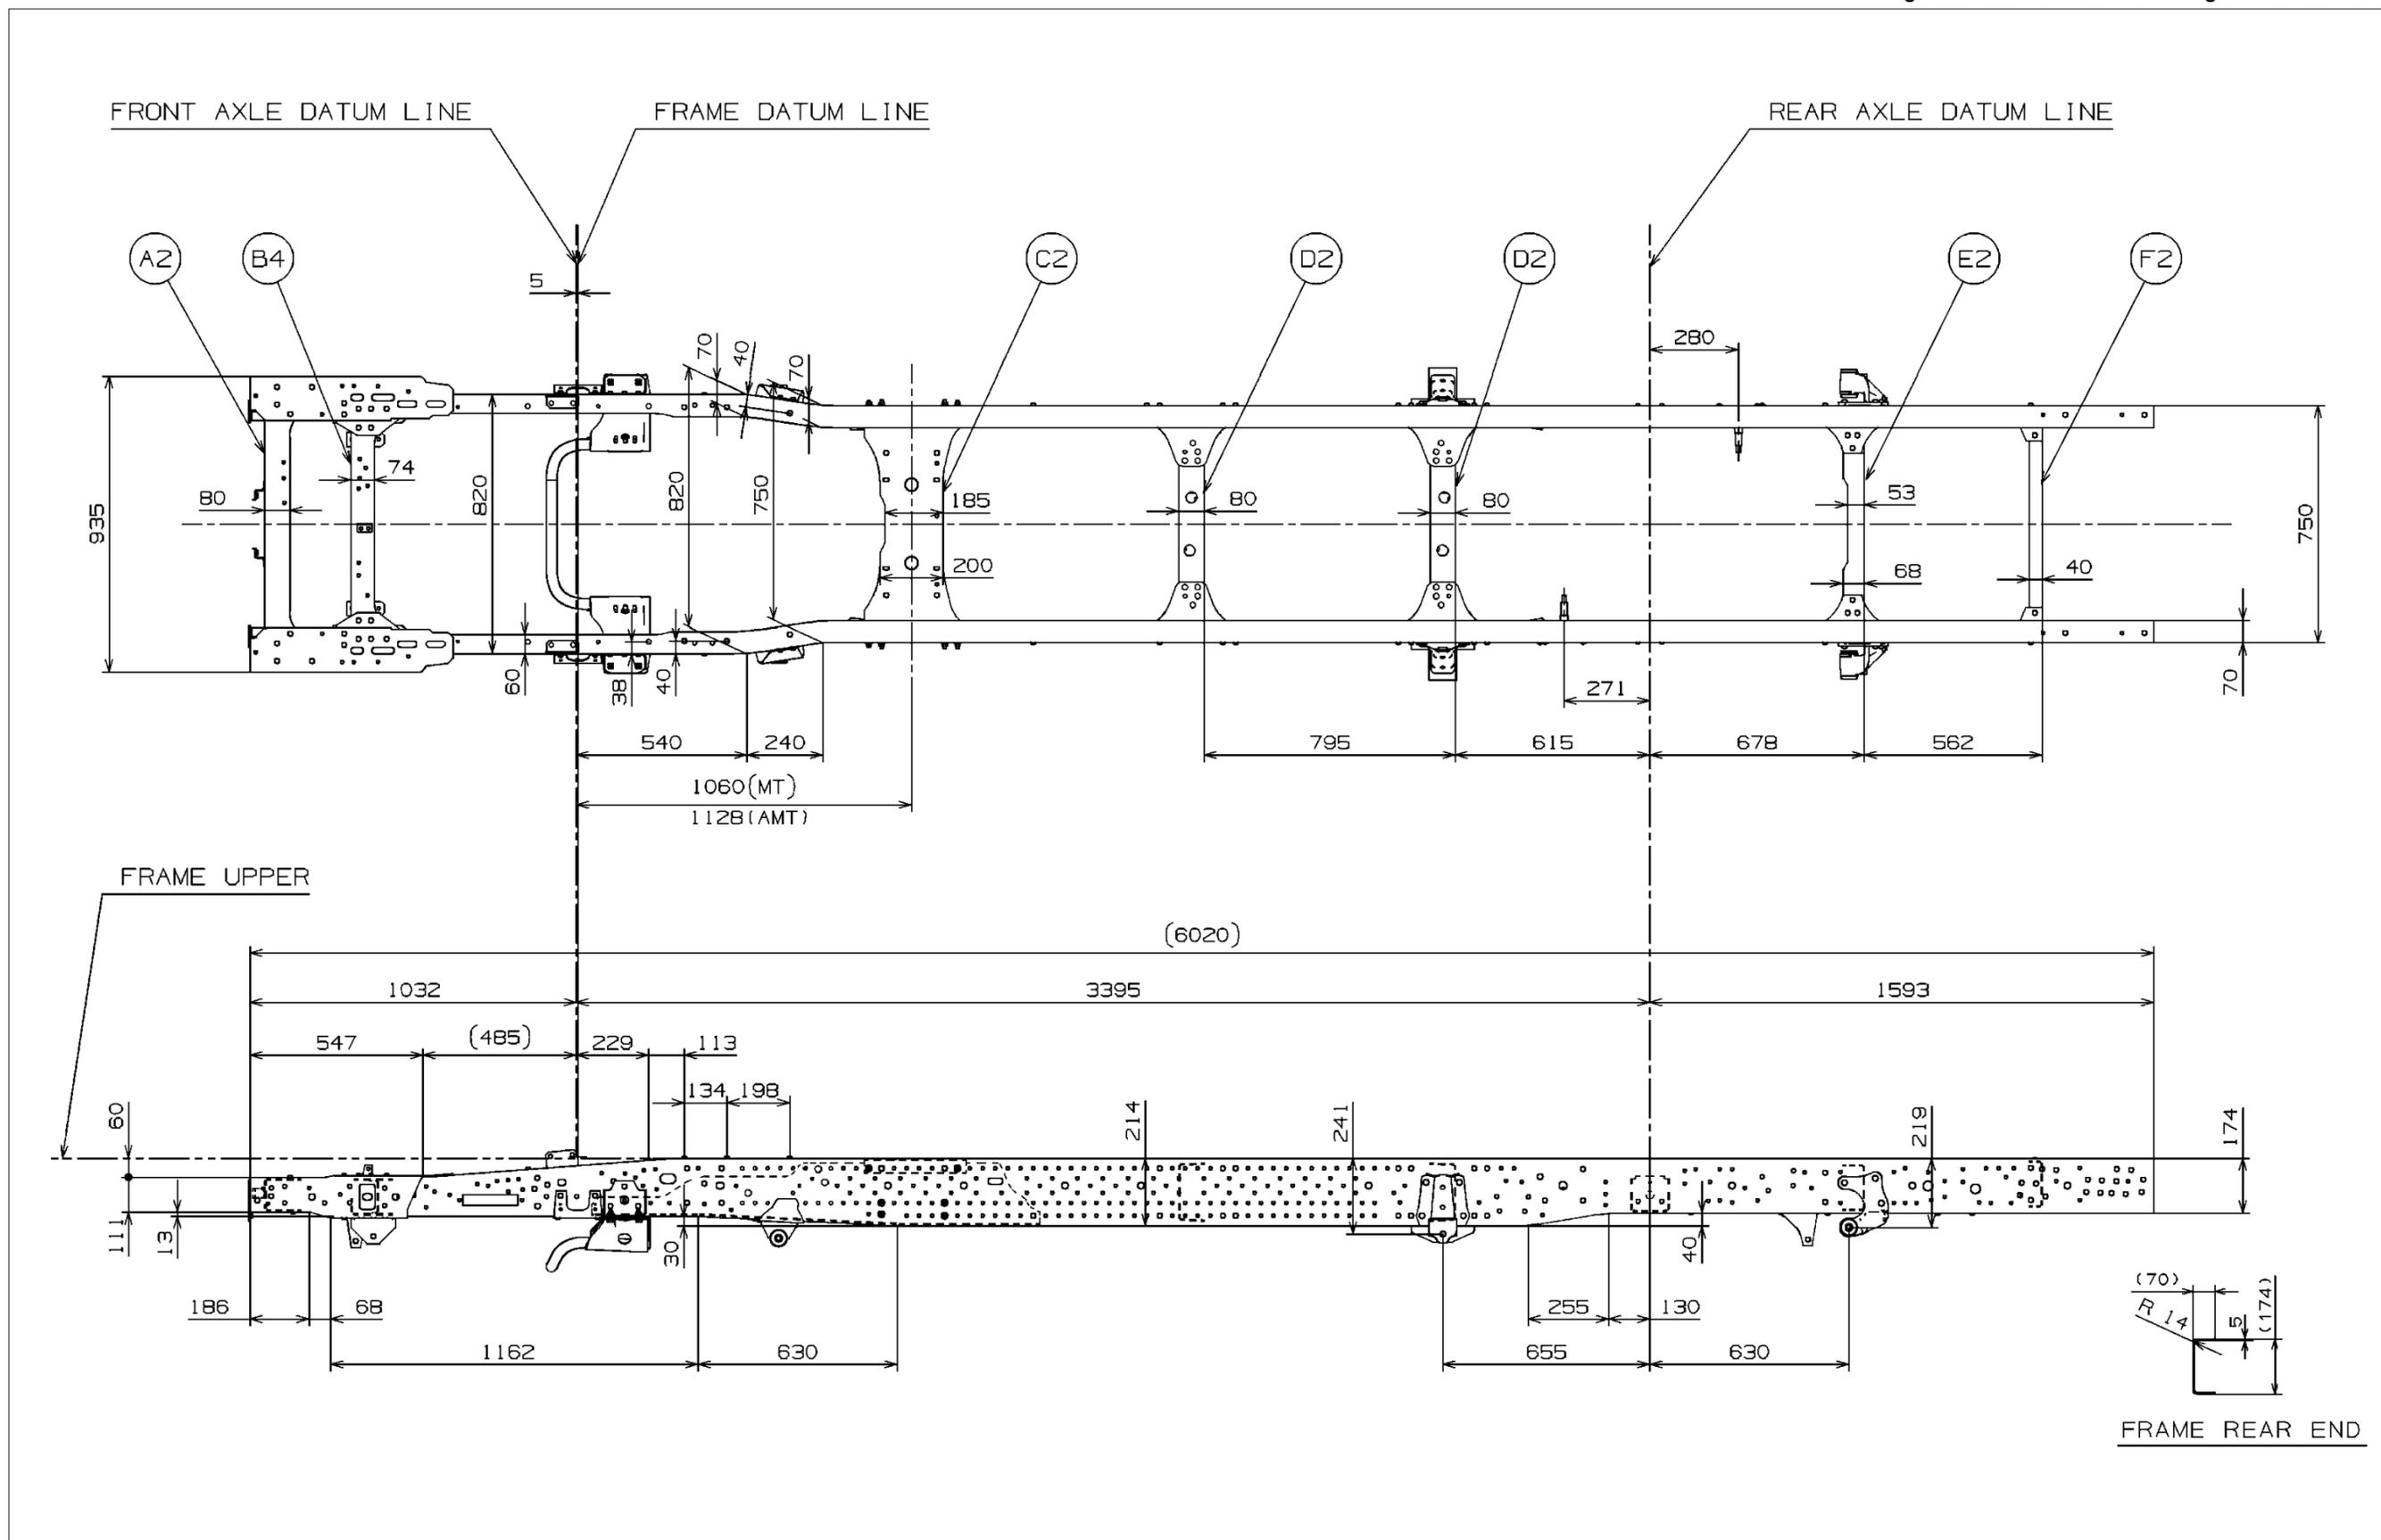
Chassis Frame Drawing NPR85L/U-HH5AYE, HJ5AYE
